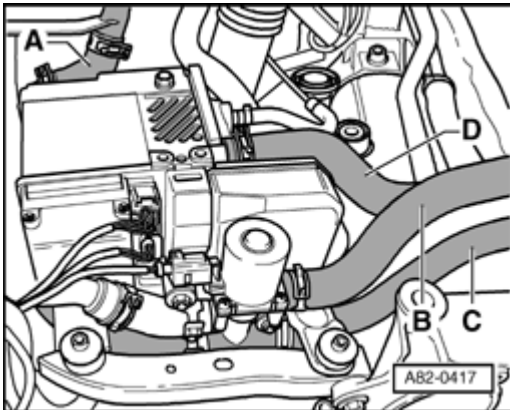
Disconnecting Coolant Hose From Parking Heater
